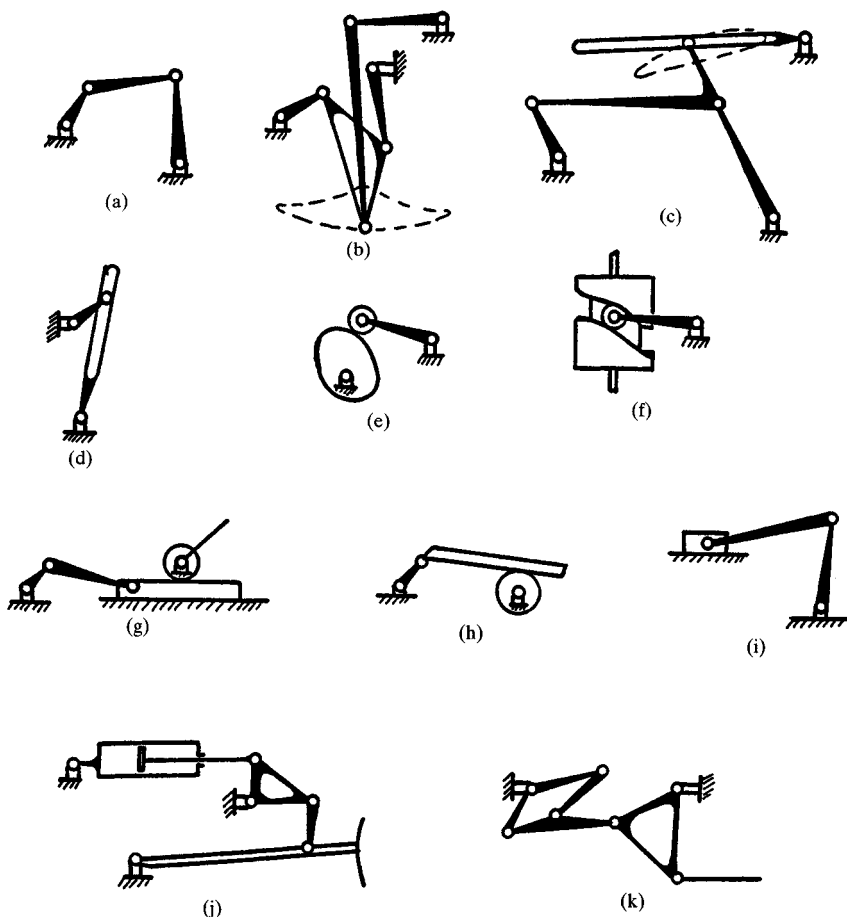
Oscillating mechanisms I. These mechanisms cause an output to repeatedly swing through a preset angle. (a) Four-bar linkage; (b) six-bar linkage; (c) six-bar linkage with pin in slot; (d) inverted slide-crank quick-return linkages; (e) radial cam and follower; (f) cylindrical cam; (g) geared slider crank; (h) geared inverted slider crank; (i) slider-driven crank; (j) bulldozer lift mechanism; (k) oscillator of the Corliss valve gear.
